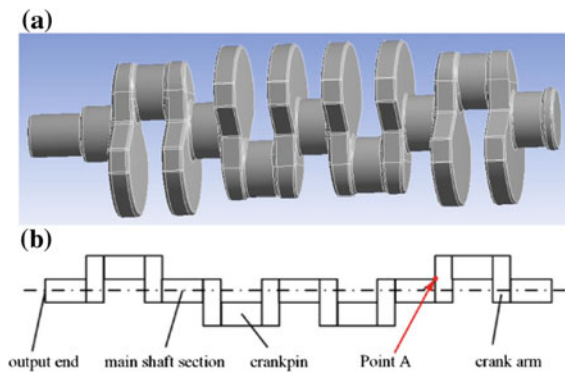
a 3-dimensional model of a 4-cylinder crankshaft, b a schematic sketch of the crankshaft in a 2-dimensional plane
